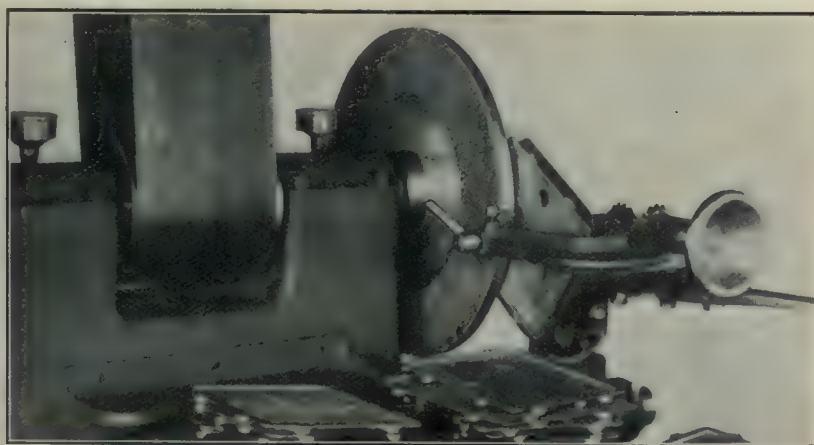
Grinding Jacket Plates, Showing Special Jig.
